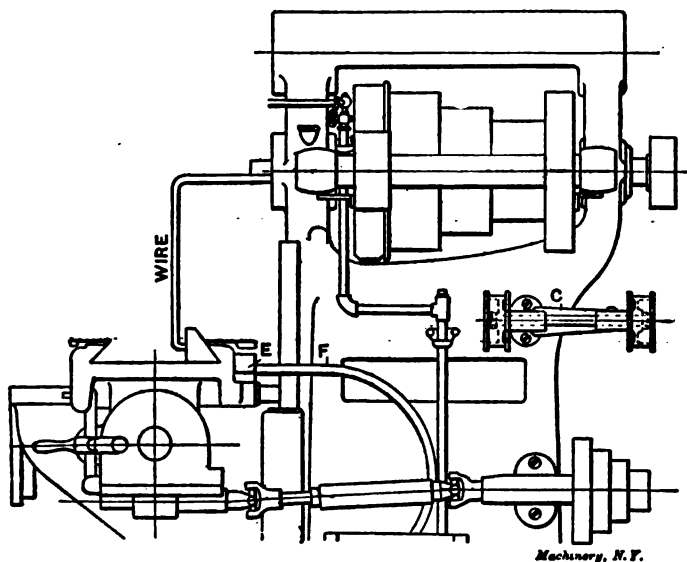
Testing the Alignment of the Milling Machine Saddle
